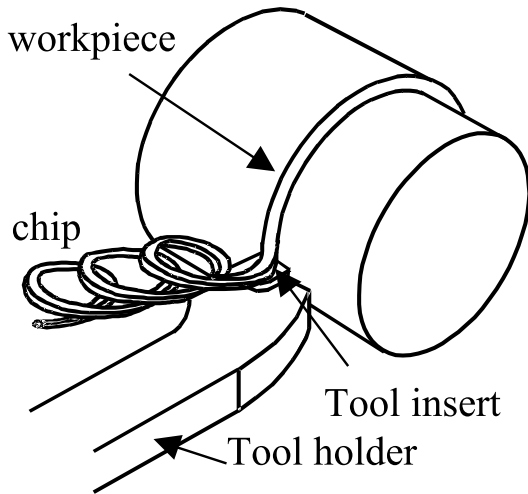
Schematic representation of a turning process. The three parts of the system are the tool (tool insert and tool holder), the chip and the workpiece.
